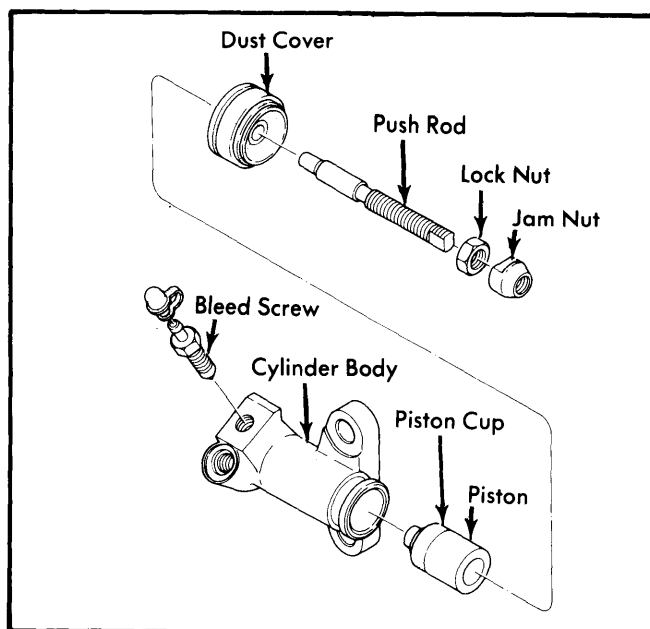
Exploded View of Clutch Slave Cylinder (B210 Models Shown)
